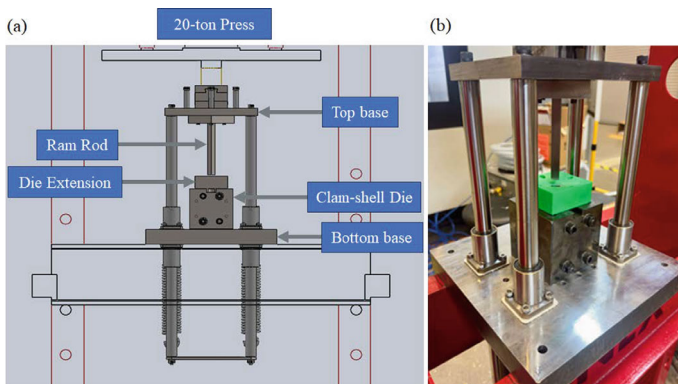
a CAD representation of the chip compactor assembly mounted on the hydraulic press and b final chip compactor on press
